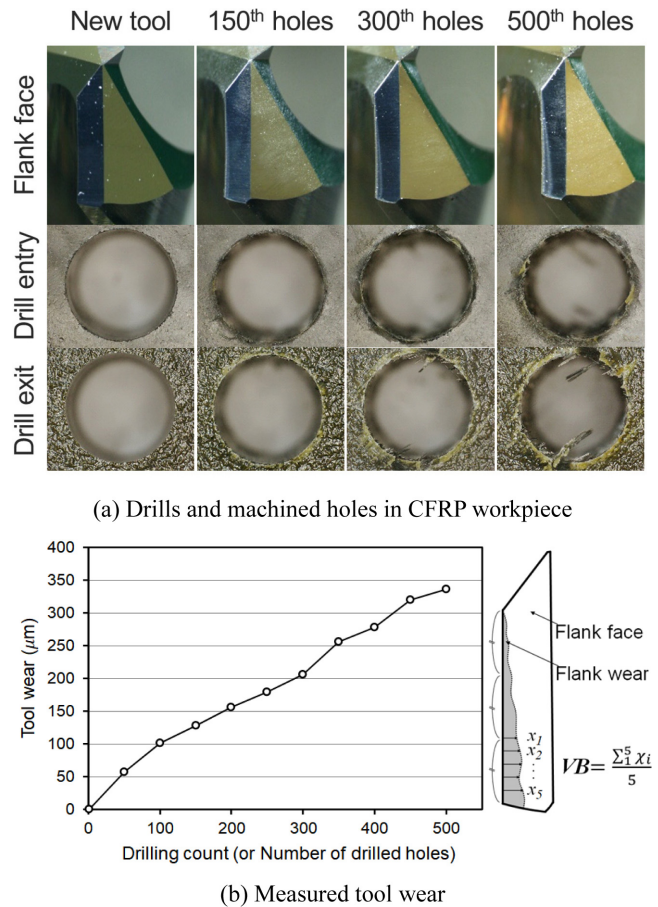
Tool wear and machining quality with respect to drilling count (Equivalently, number of drilled holes) during drilling 500 holes in CFRP
